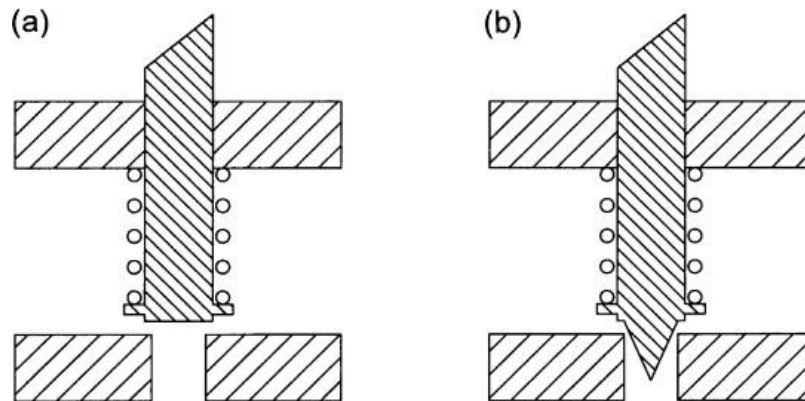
Rod Valve (a) Basic flat ended (b) Taper ended ^[9]
